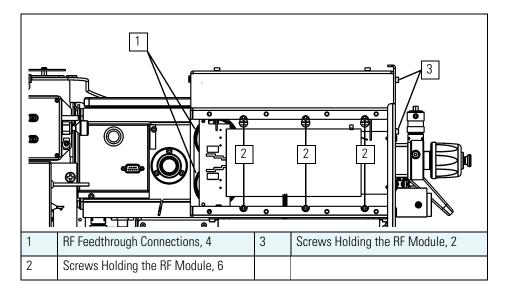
RF Module with RF Coil Cover Removed (Left Side)
